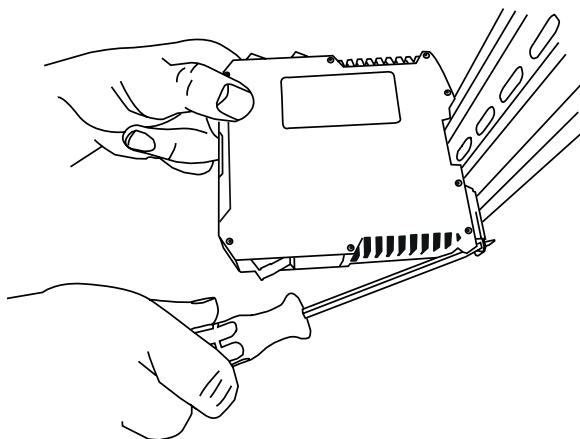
Demounting des VT-MSPA...-2X from the DIN rail
